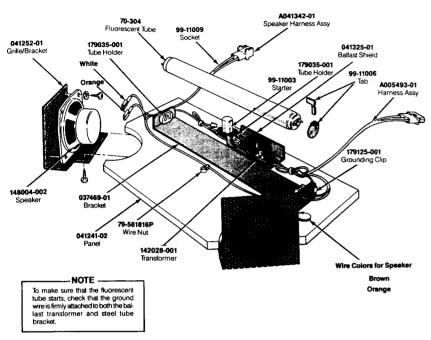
Fluorescent Light and Speaker Board Assembly
